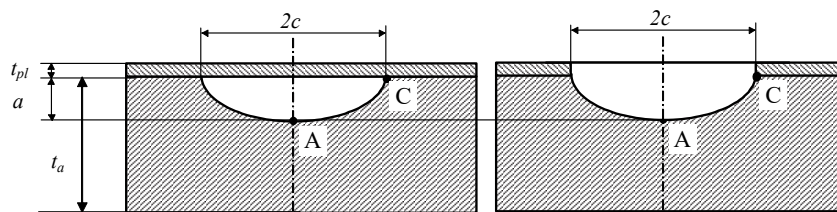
The two crack types defined for Fracture Mechanics analyses [6, 7].
